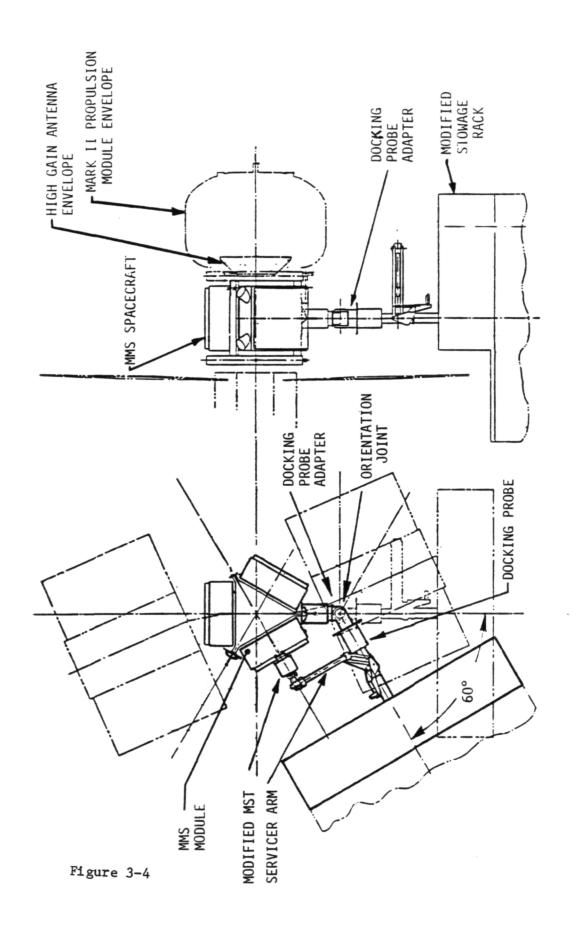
MMS Module Exchange Using Straight Docking Probe Adapter and Tool Adapter
